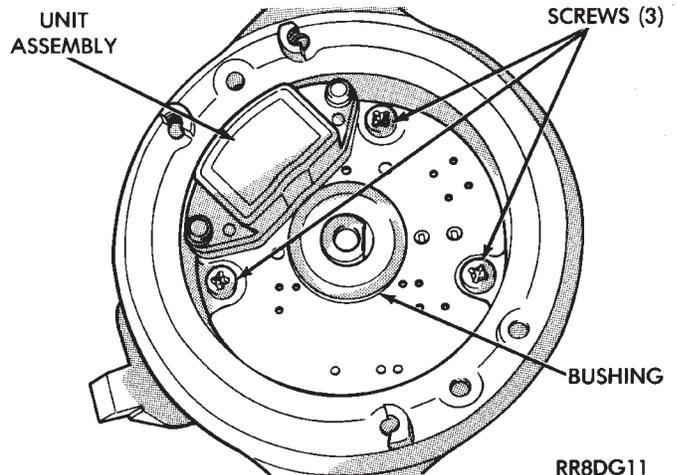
Photo Optic Sensing Unit Assembly and Bushing
